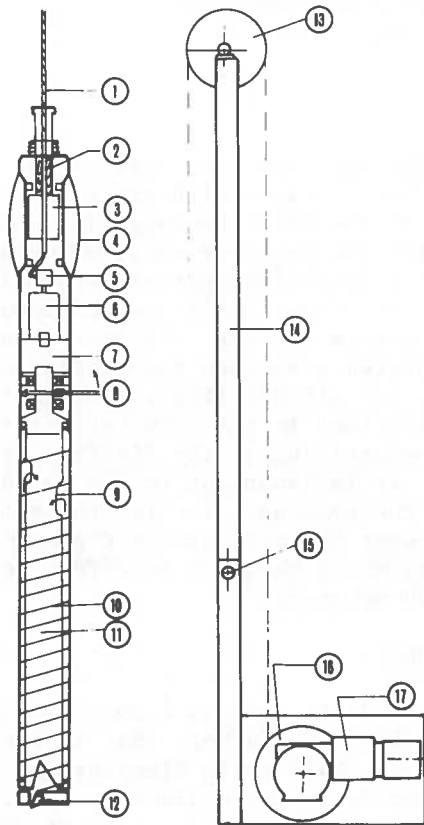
Schematic diagram of the drill, tower and winch assembly. (1) Electro-mechanical cable. (2) Cable termination. (3) Knocker weight. (4) Spring. (5) Slip-ring. (6) Submersible motor. (7) Gear reducer. (8) Clutch. (9) Chip inlets. (10) Auger flights. (11) Core barrel. (12) Cutters. (13) Sheave. (14) Mast. (15) Rotation axis of mast sections. (16) Cable drum. (17) Hydraulic motor reducer.
